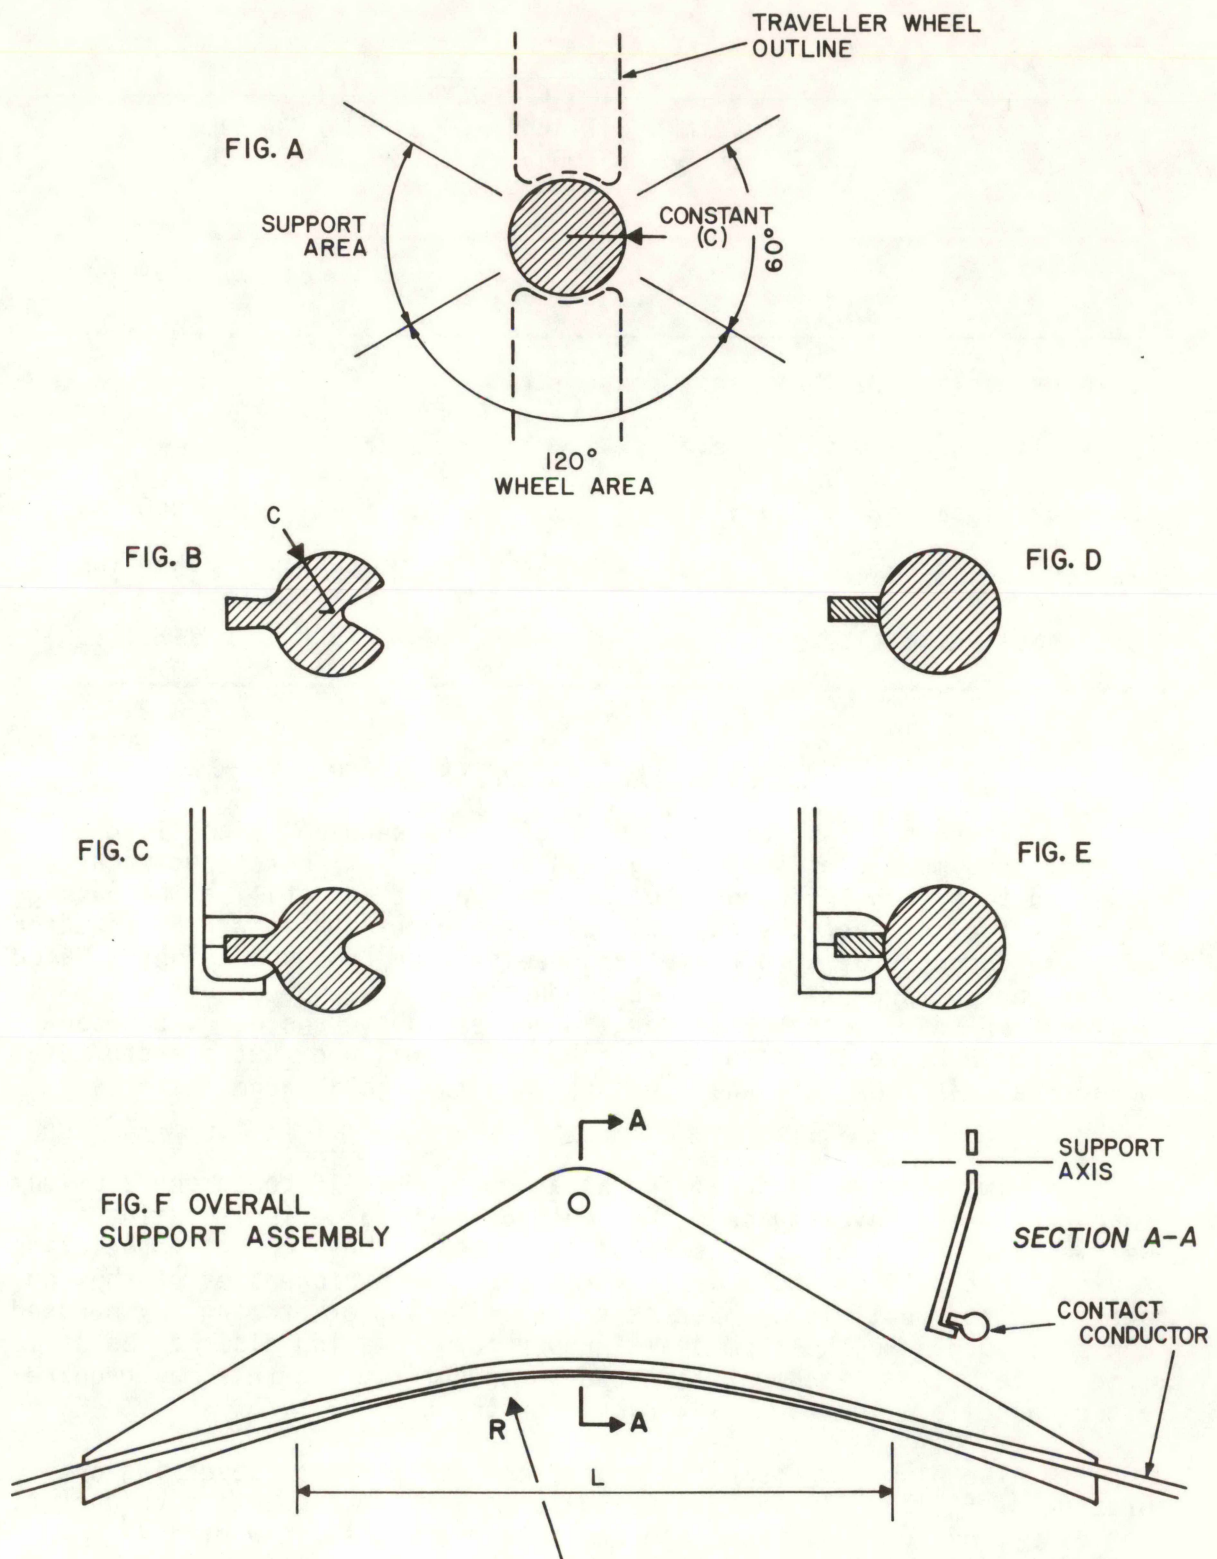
CONTACT CONDUCTOR ATTACHMENTS AND SUPPORT ASSEMBLY
